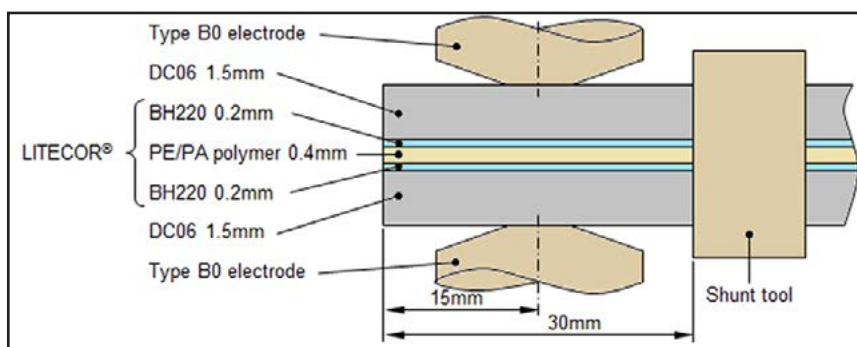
Schematic illustration of spot welding of LITECOR[®] between two DC06 deep drawing steel sheets by utilization of a shunt tool to allow current flow before metal-metal contact in the weld position.
